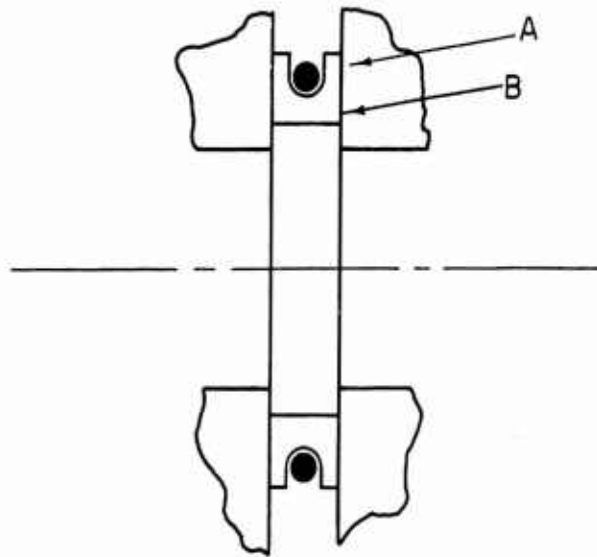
EXTERNAL-EXPLOSIVE SEAL
